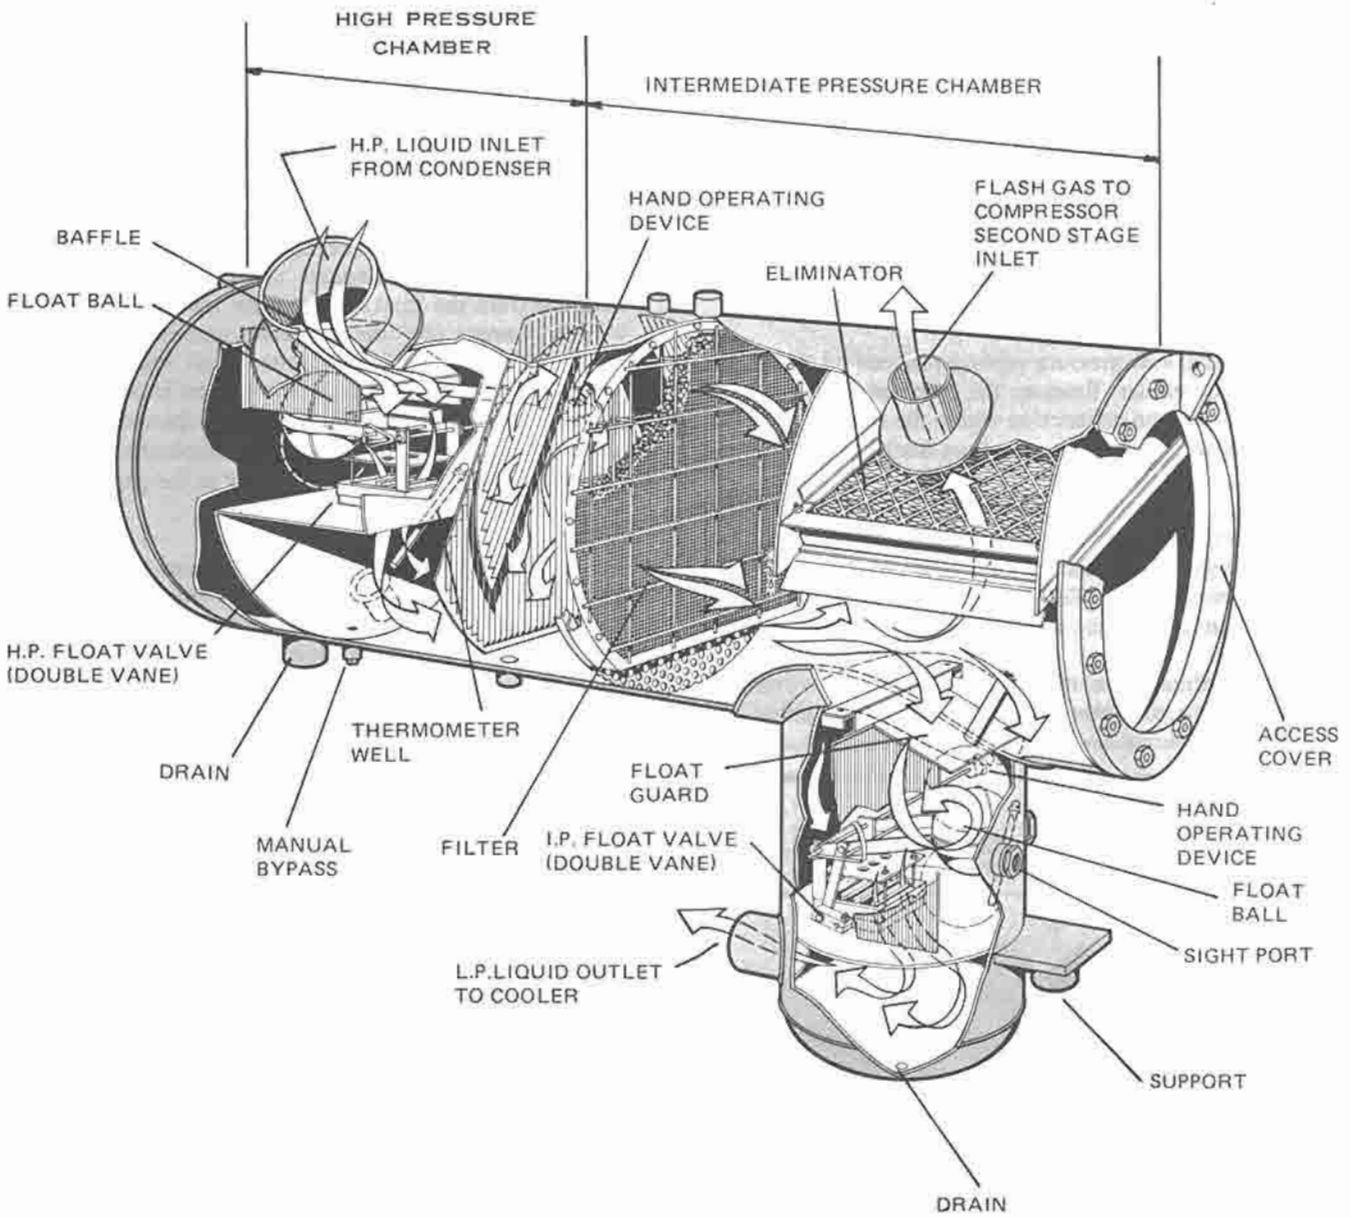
CUT-AWAY VIEW, SINGLE STAGE INTERCOOLER (40" DIA. & LARGER)
